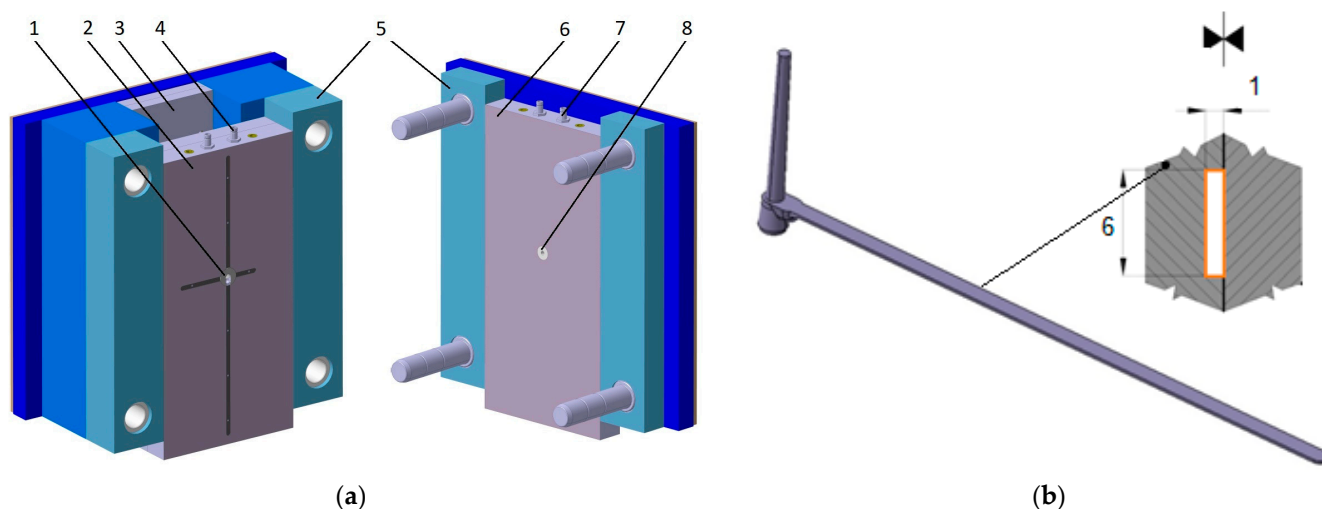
Injection mold cavity: (a) Test mold, 1—sprue holder, 2—mold plate, 3—ejection plates, 4—tempering system right, 5—mold frame, 6—test mold plate, 7—tempering system left, 8—sprue insert; (b) cross-section of mold cavity.
